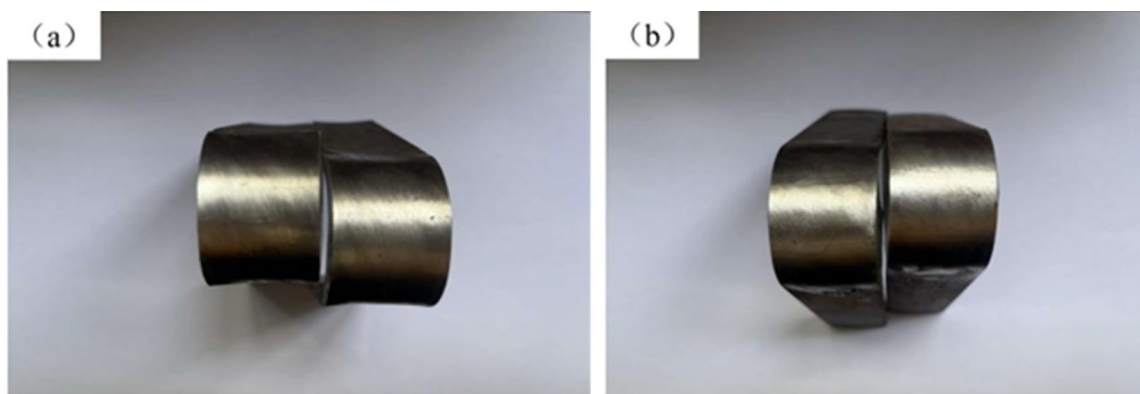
Surface morphology of side bending specimens of 12MnNiVR steel welded joints with different compositions: (a) TFS, (b) TCS
